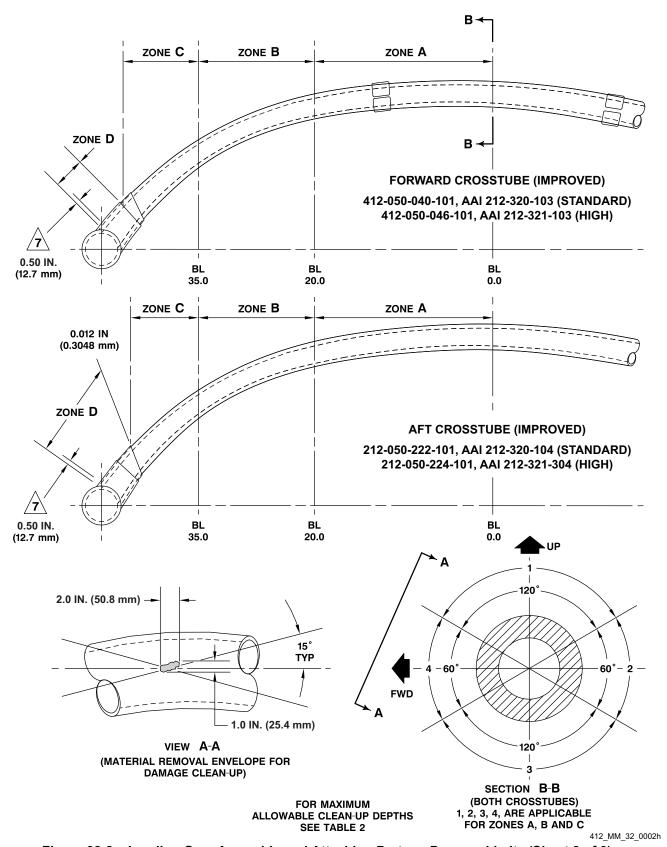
Landing Gear Assembly and Attaching Parts — Damage Limits (Sheet 8 of 9)
